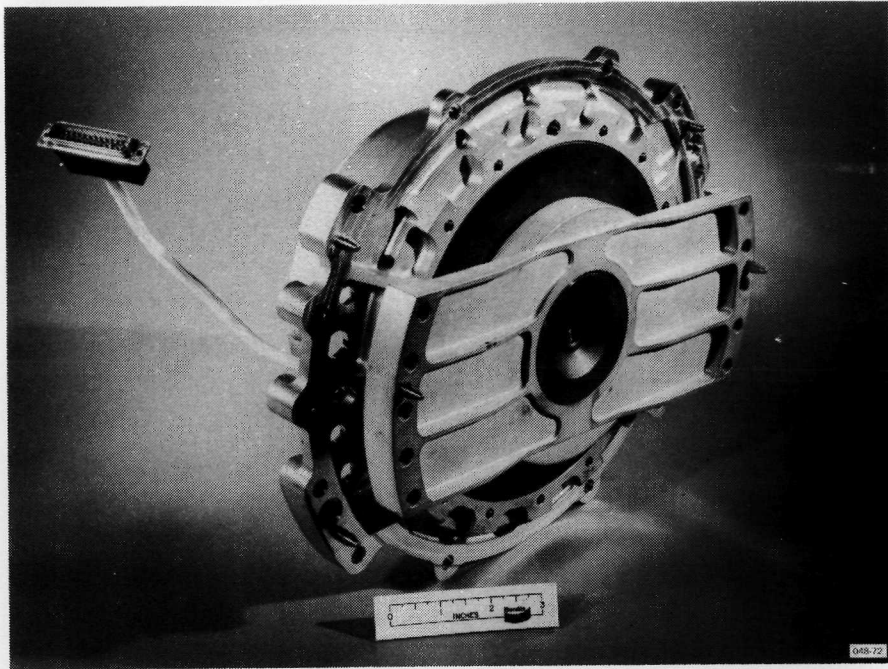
Flightweight Actuator Model EH-818-U2 Assembly (Front View)
